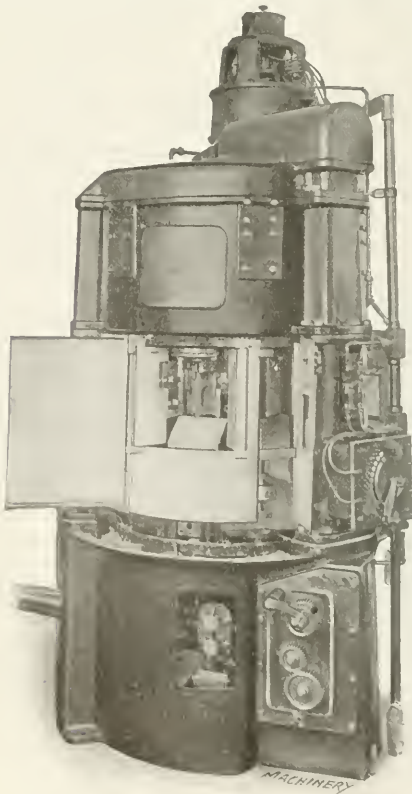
Loading Station and Electrical Control on Baush Drilling Machine
